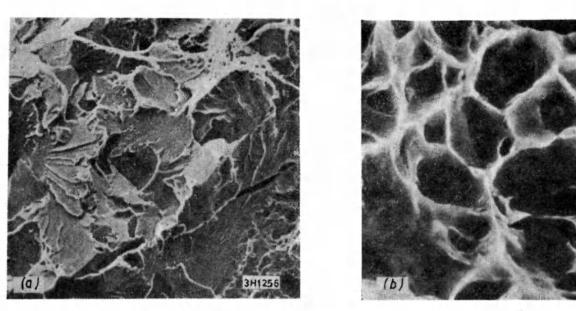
Fracture mechanisms in weld metal (a) Cleavage; (b) Microvoid coalescence
